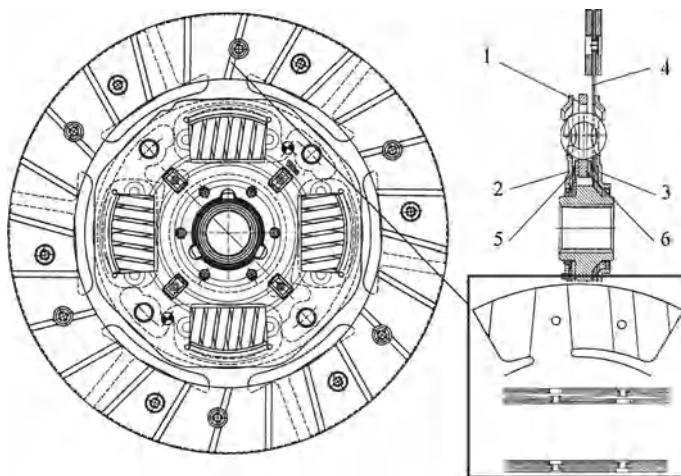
Driven plate (courtesy of Valeo). The cross section shows the main and auxiliary torsion dampers. The detail on the right shows how friction liners are mounted on the disc, in order to make the engagement progressive
